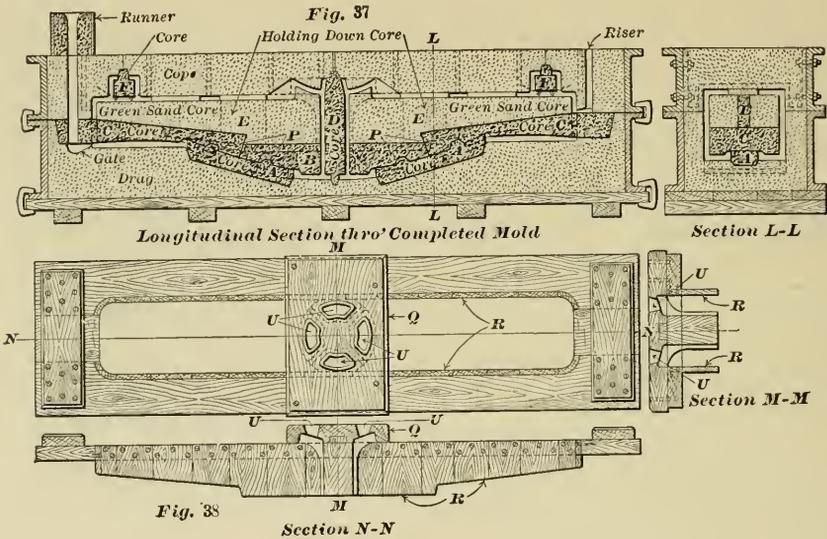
Section of Mold      Fig. 38. Rig for Ramming up the Green Sand Core
